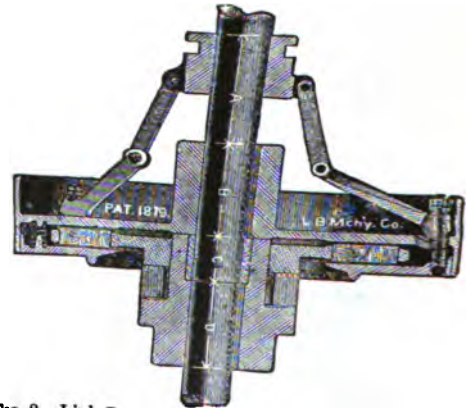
Link Belt Eng. Co.'s disk friction-clutch.
